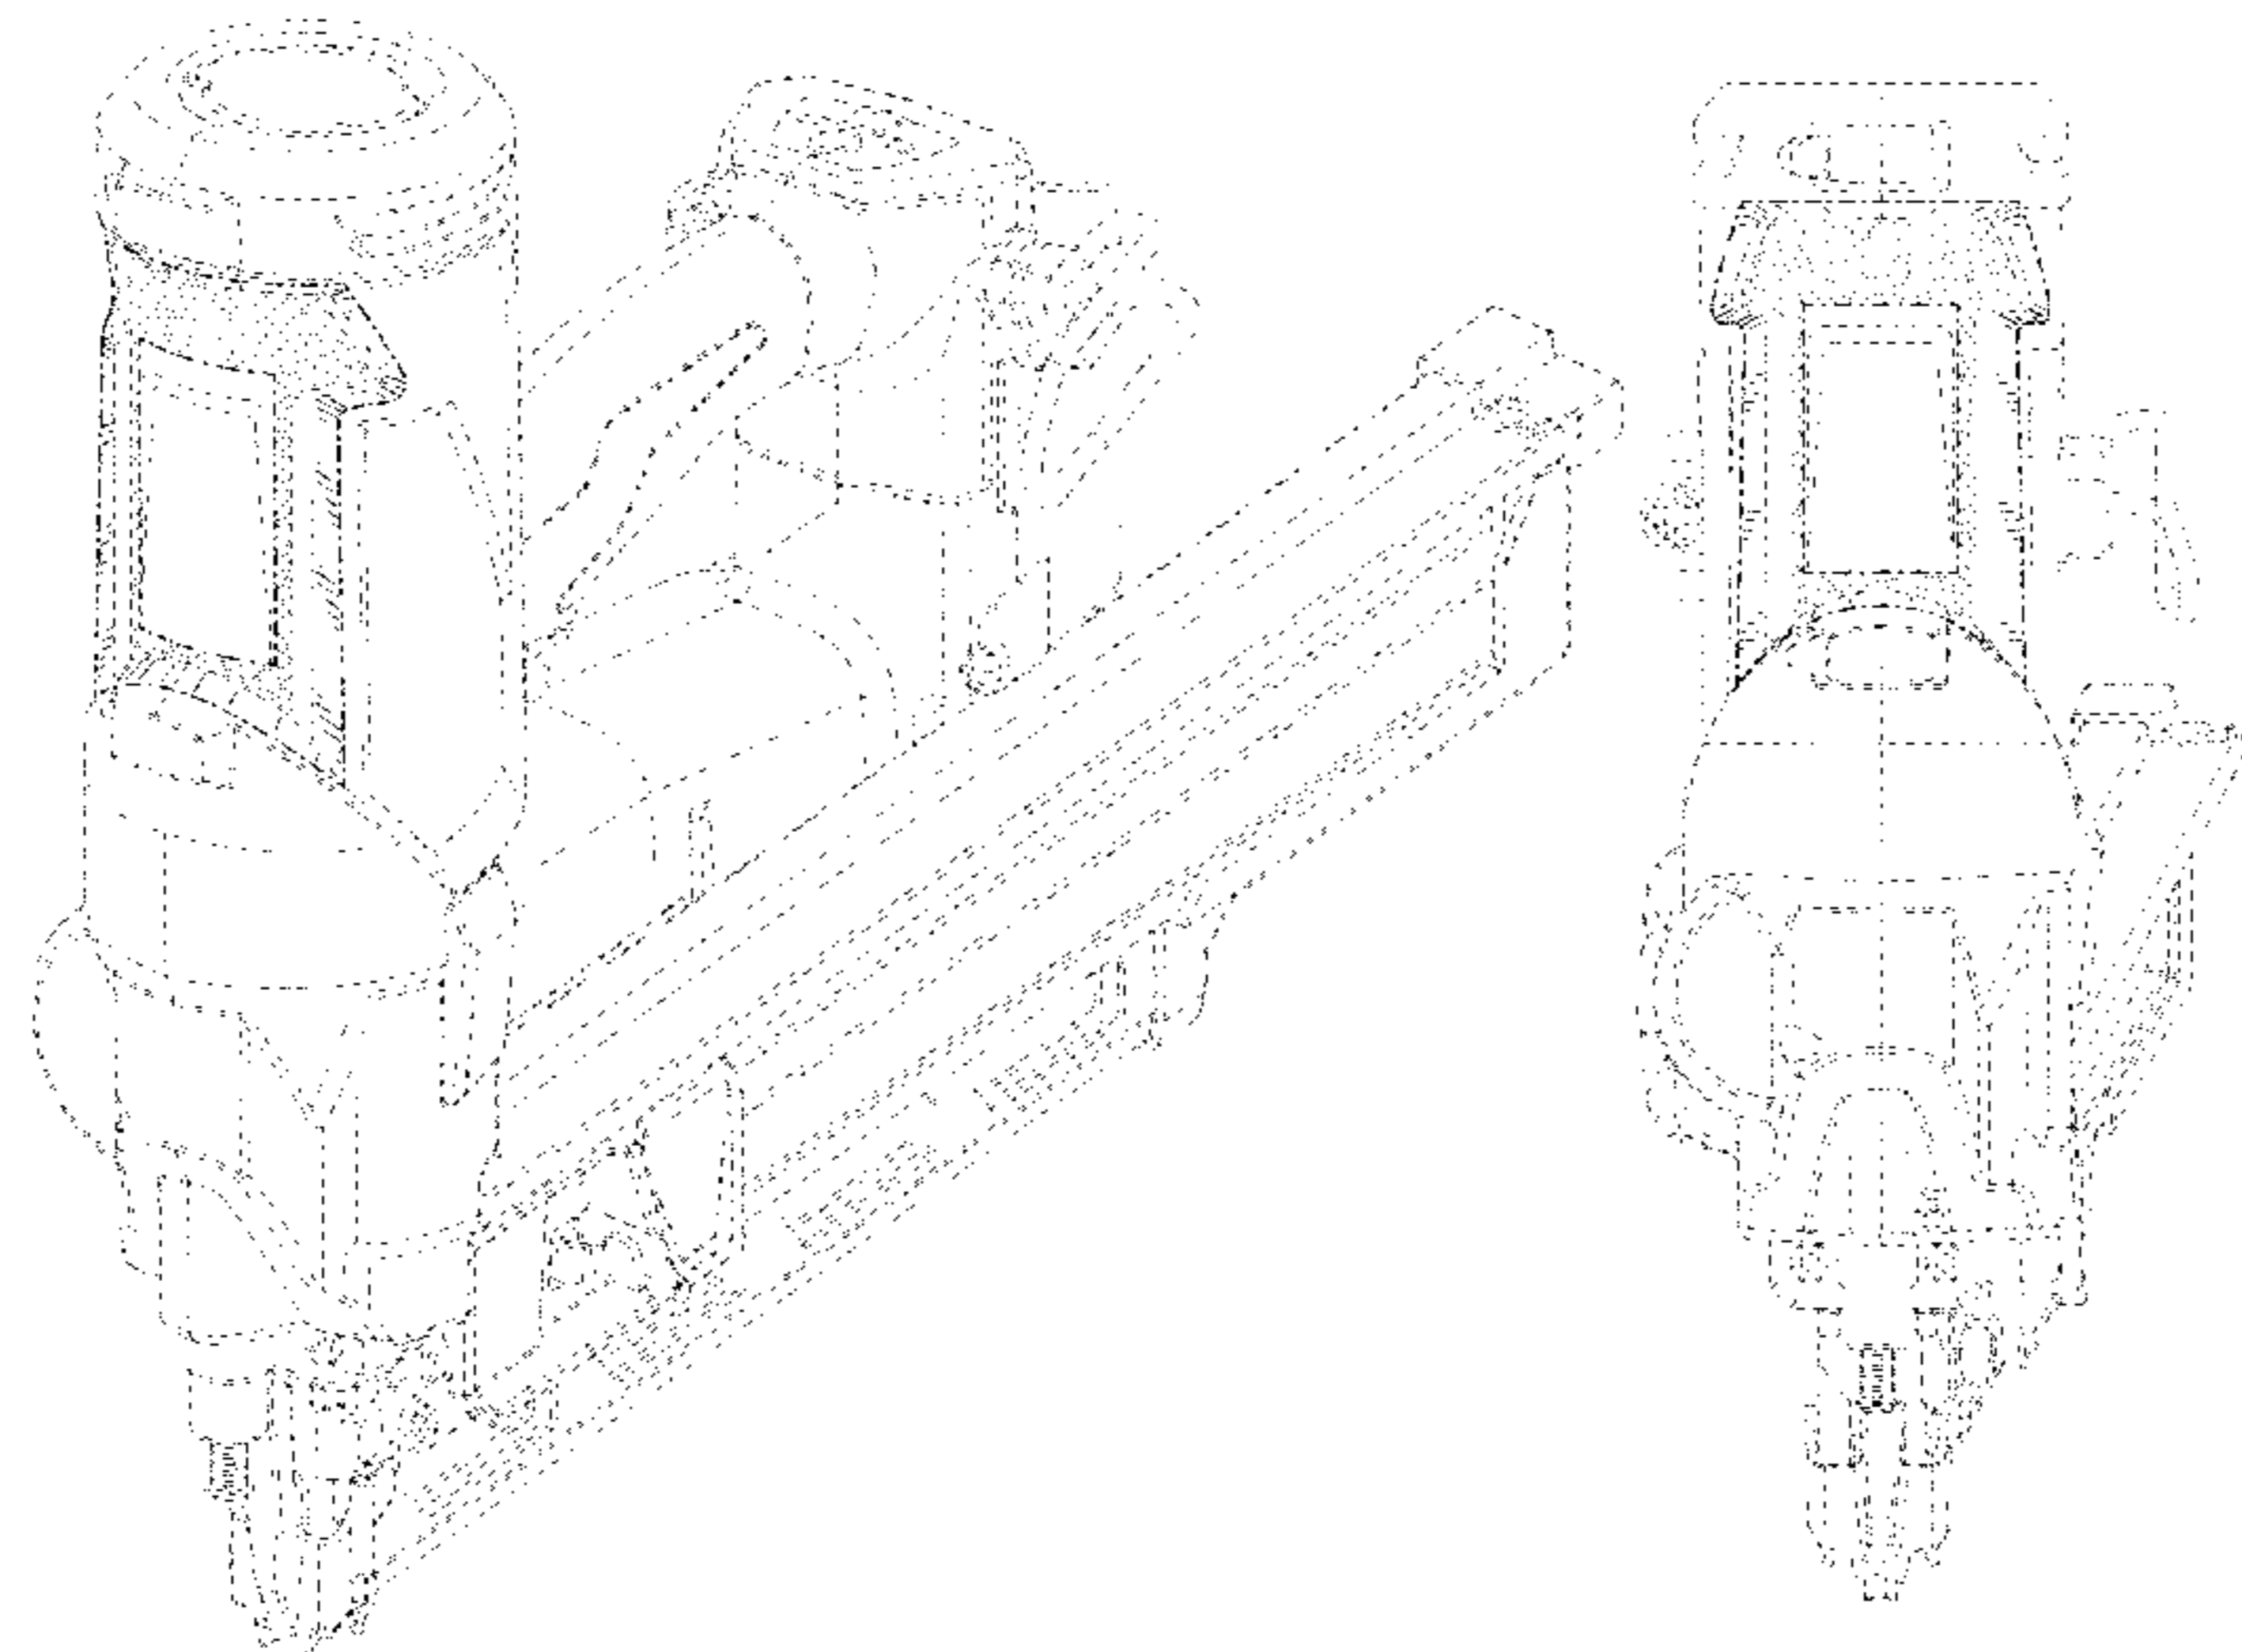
is a rear view of the powered fastener driver of FIG. 1.
